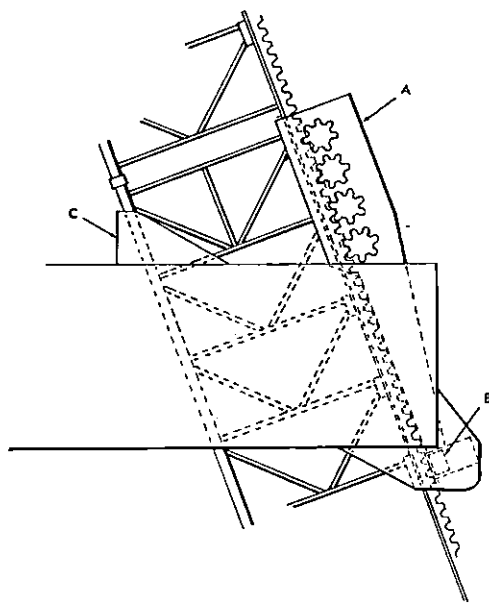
Drawing shows continuous engagement of spud rack and pinions; also barge guide and "hinge" arrangement of spud locomotives.
